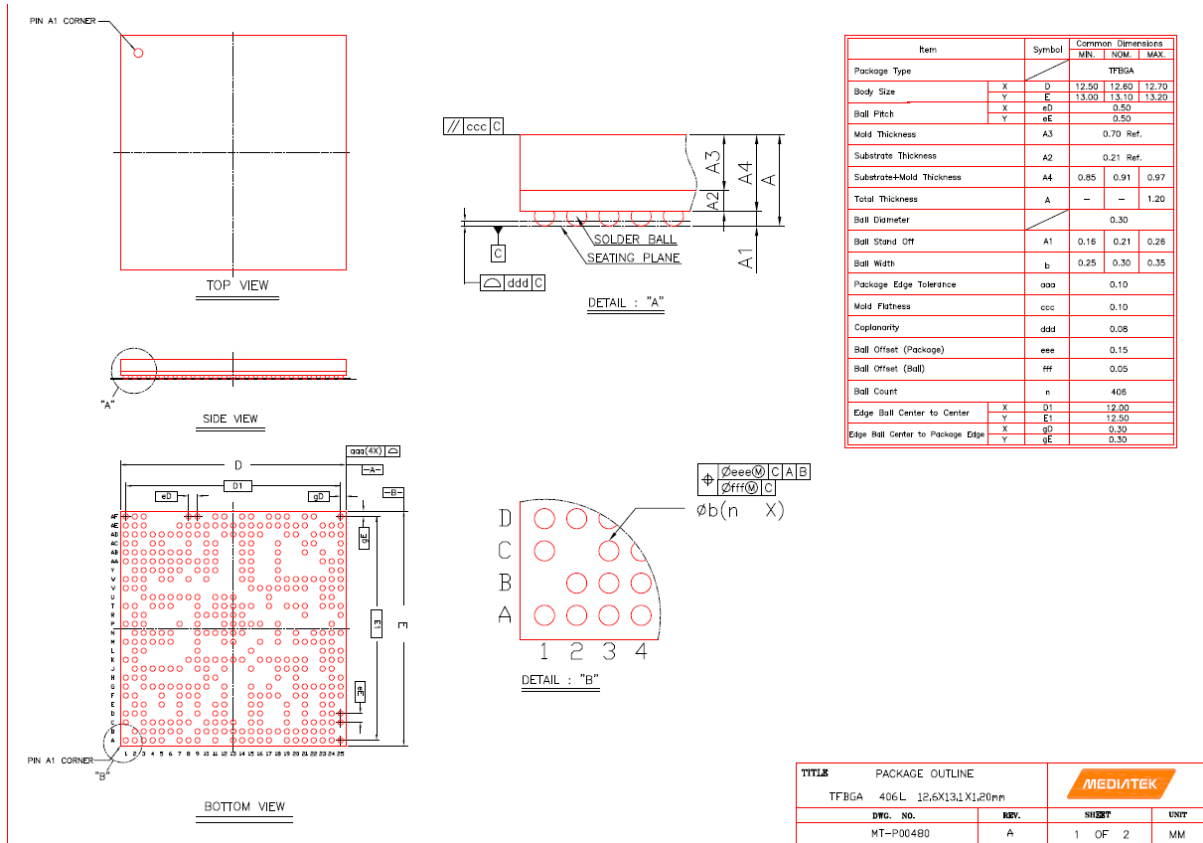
Outlines and dimensions of TFBGA 12.6mm *13.1mm, 406-ball, 0.5mm pitch package
